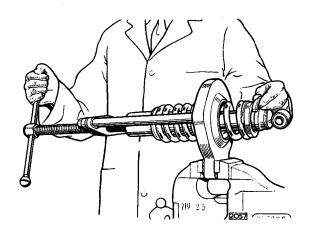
Removing the rear road spring from the hydraulic damper with Tool Part No. J.11A in conjunction with Hand Press Tool No. SL.14.
